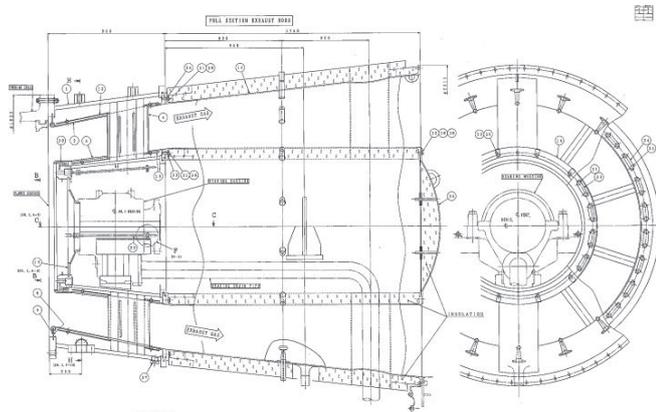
(a) Exhaust hood inner barrel where bearing 1 housing is located
